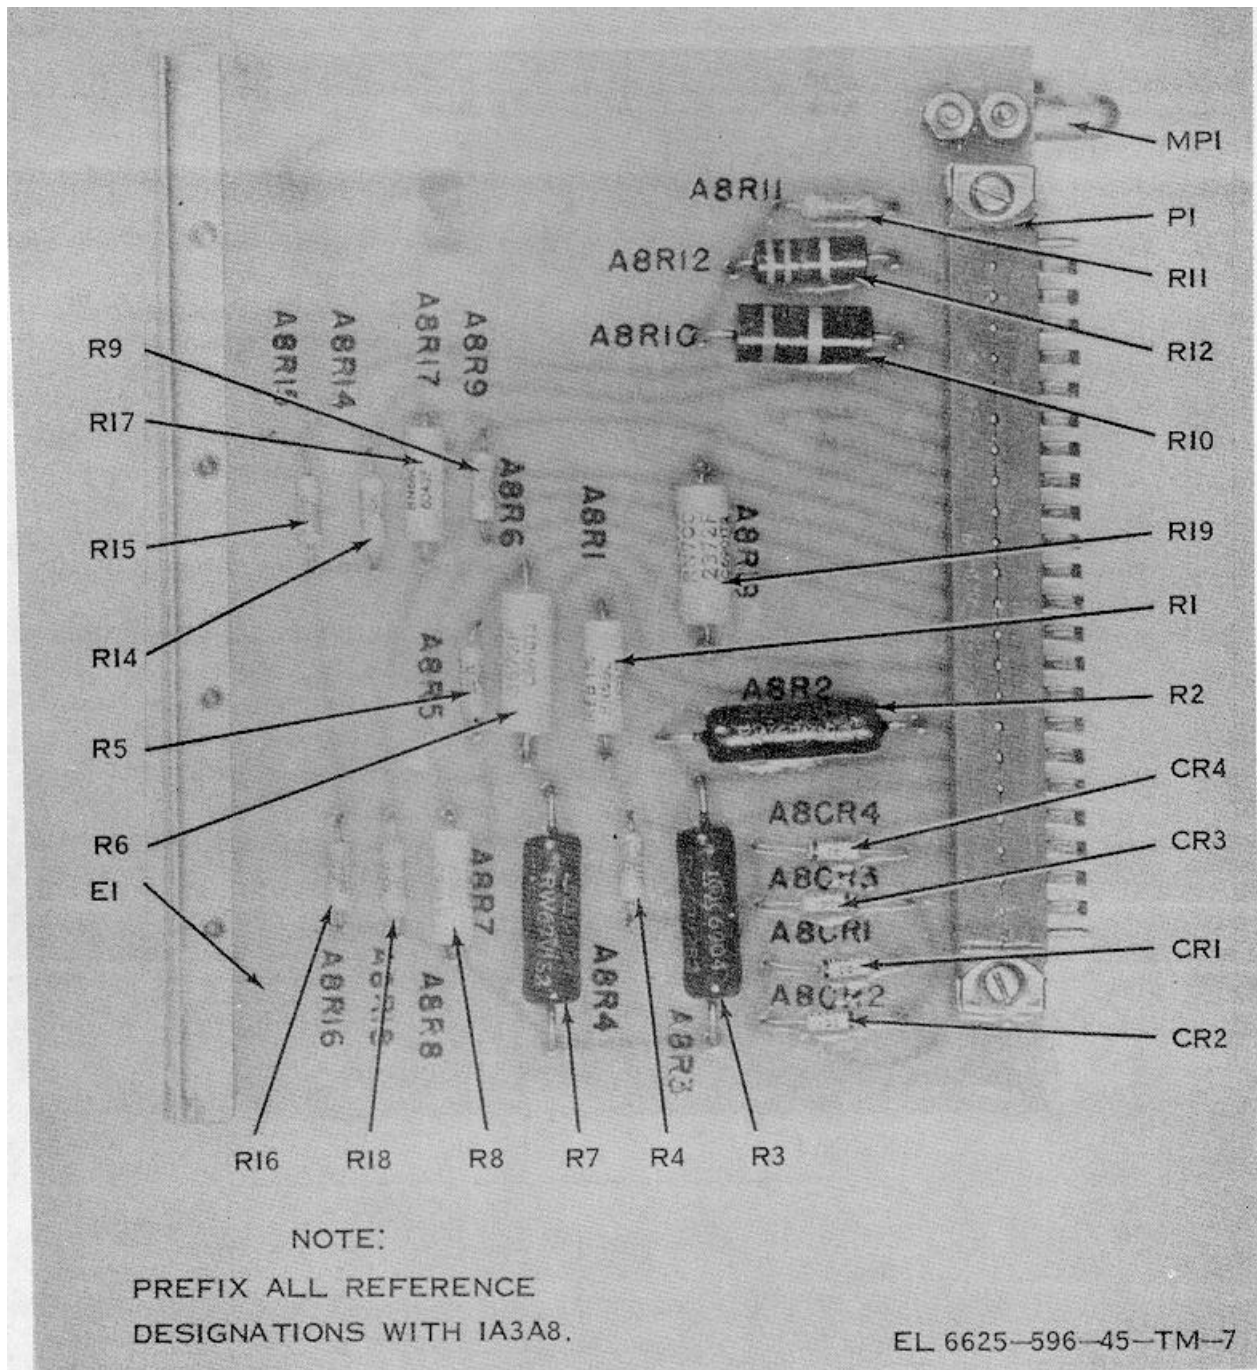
Ring generator assembly, 1A3A8, parts location.
